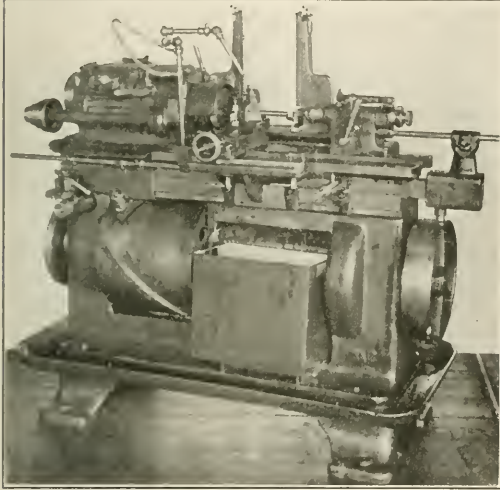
Pratt & Whitney Automatic Engine Lathe
